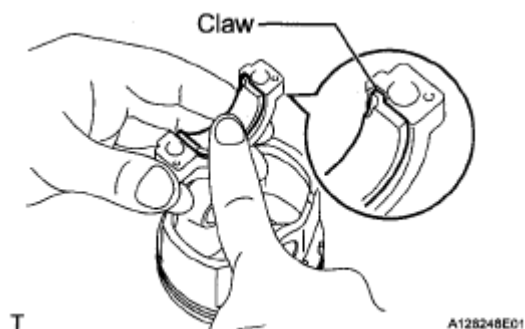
View Of Piston Sub-Assembly With Connecting Rod
